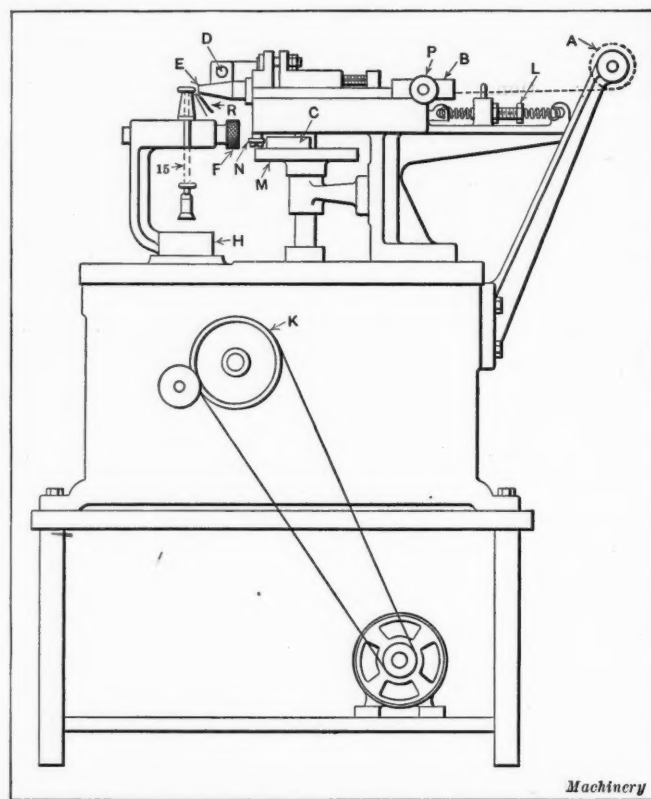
Machine used for inserting Hook End of Nickel Wires
